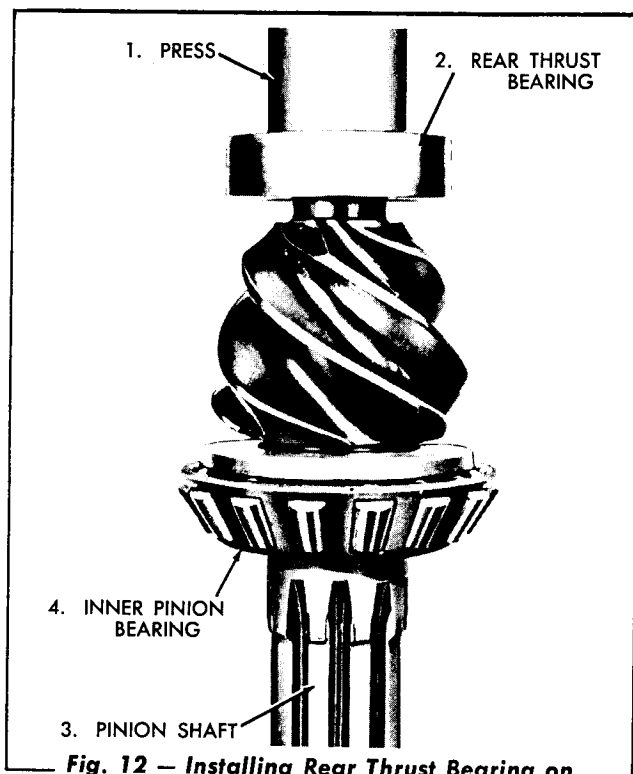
Installing Rear Thrust Bearing on Pinion Shaft
